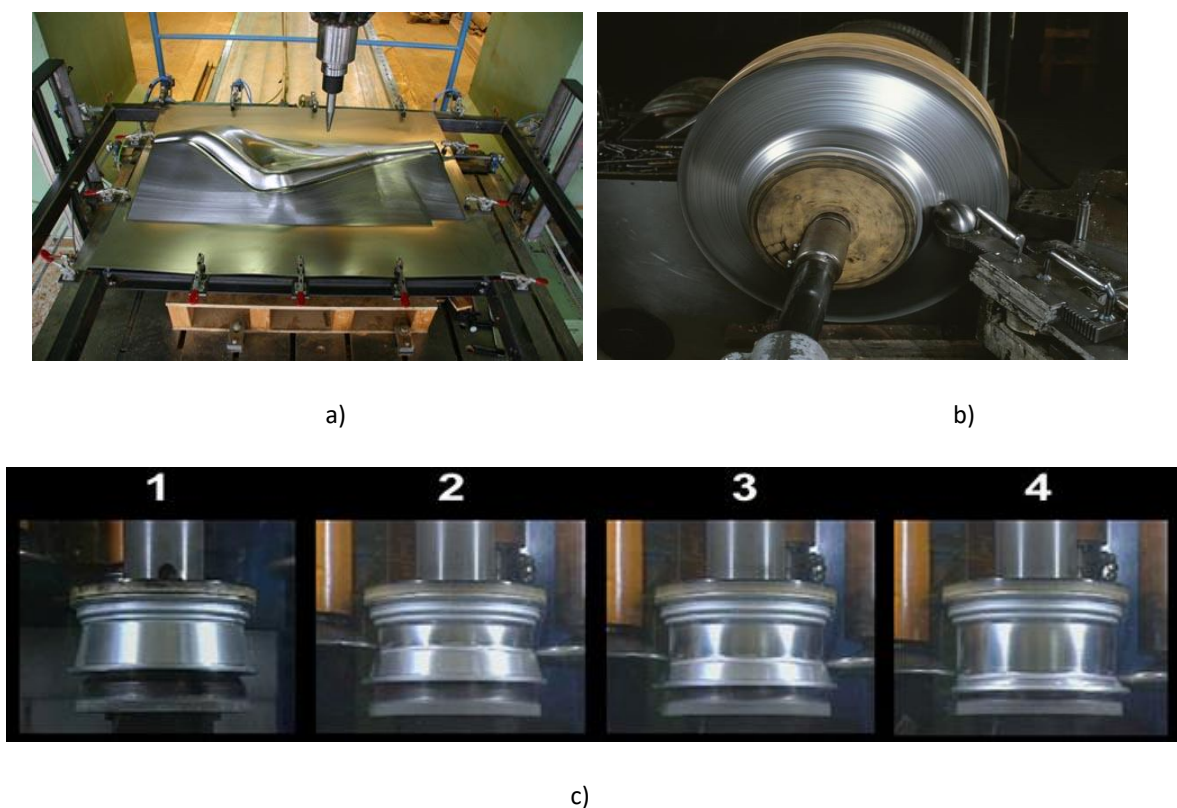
Examples of incremental forming processes. a) Incremental sheet forming [1]. b) Shear forming [2]. c) Flow forming [3].
